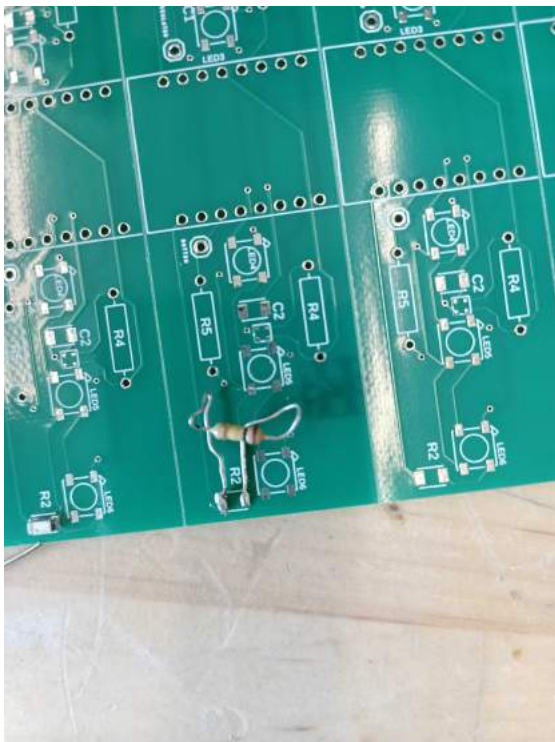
Soldering a through-hole resistor to a SMD pad also works, as checked with a multimeter.
